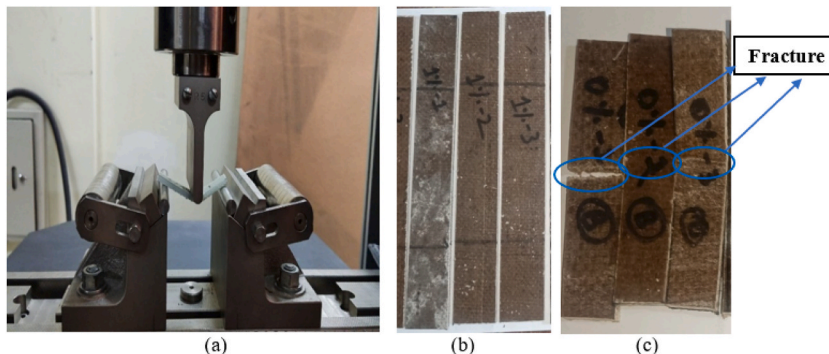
Flexural test: (a) specimen at UTM, (b) specimen before the test, and (c) specimen after the test.
